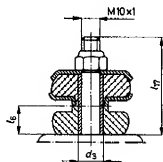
On a pin-type joint, the preload on the rubber parts should be ensured by a spacer tube. Usually this has a wall thickness of 2 mm and 14 mm outside diameter. To avoid contact in the location hole, the upper snubber can be centred by a washer. A self-locking nut is frequently used for clamping the parts together (illustration: Sachs).
